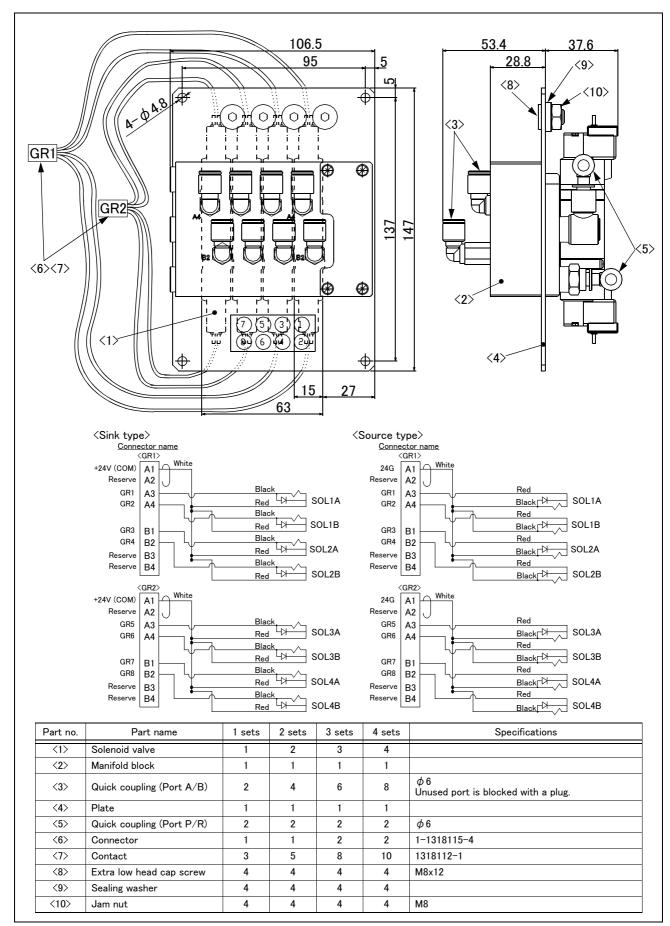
Outline dimensional drawing (1F-VD0*-03/1F-VD0*E-03)
